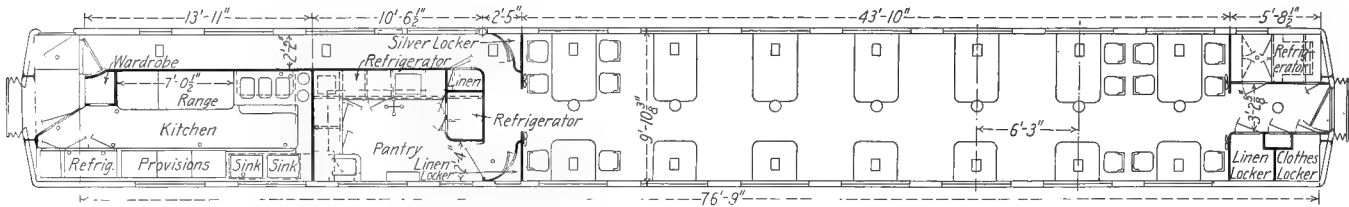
Floor Plan of New York, New Haven & Hartford Dining Car. Builder, The Pullman Company.
